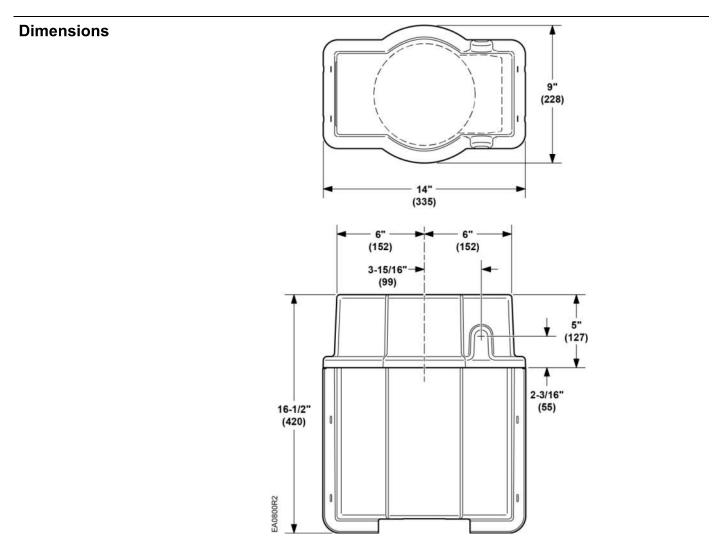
Dimensions of the 599-10065 Weather Shield in Inches (Millimeters).
